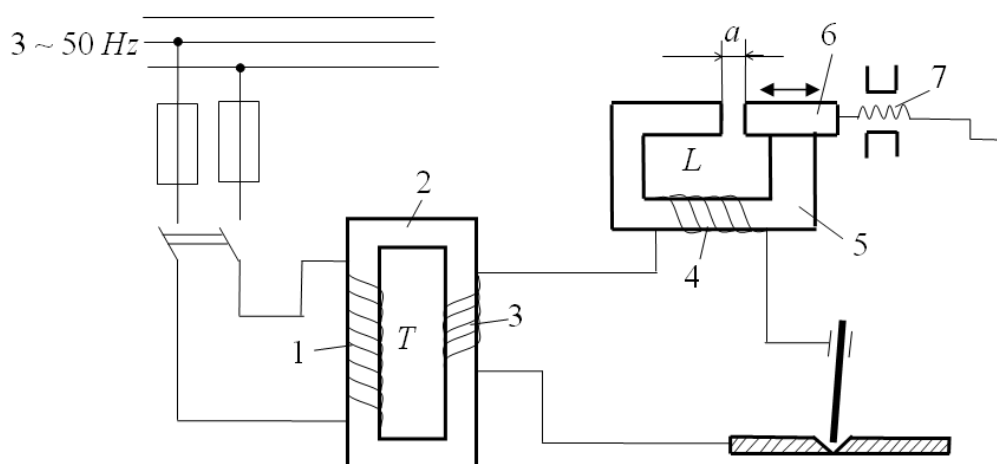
Circuit of the welding transformer with separate choke:
